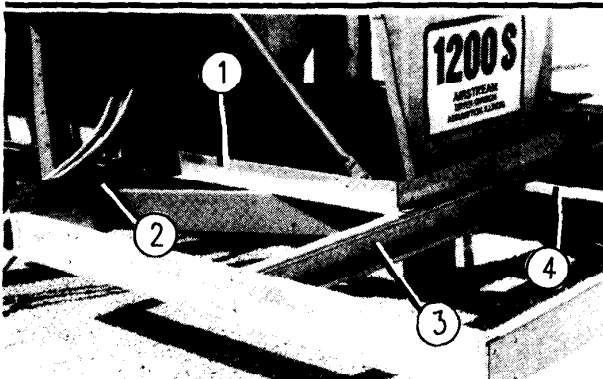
CONNECTING RIGHT-HAND FLOOR SUPPORT ANGLE
